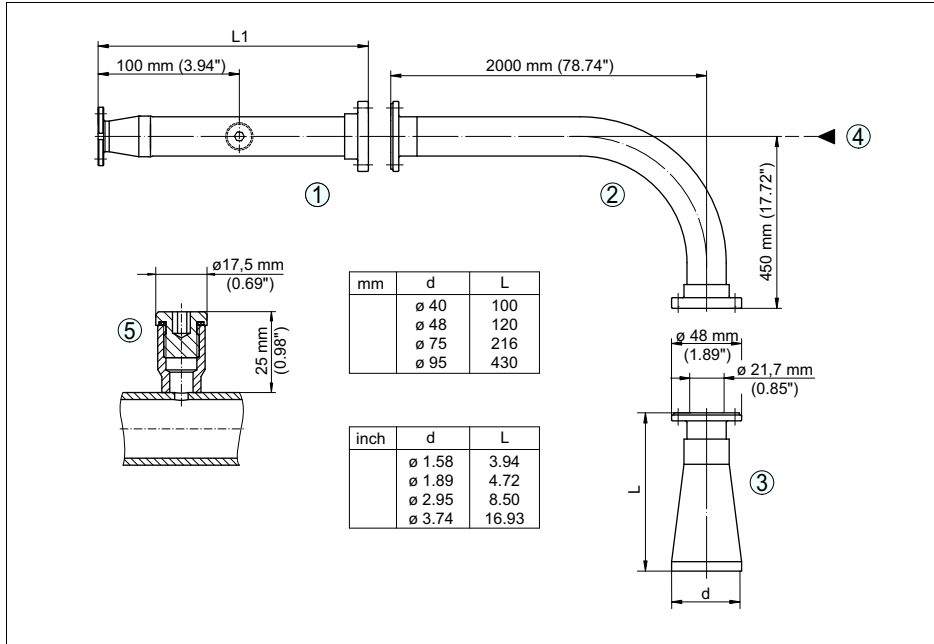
Extension multi-sectional, middle section angled, unassembled horn antenna
